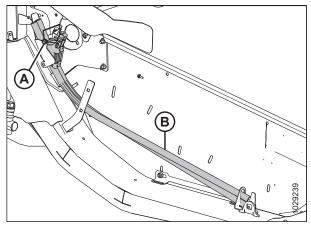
Divider Rods in Shipping Storage at Right Header Endsheet
